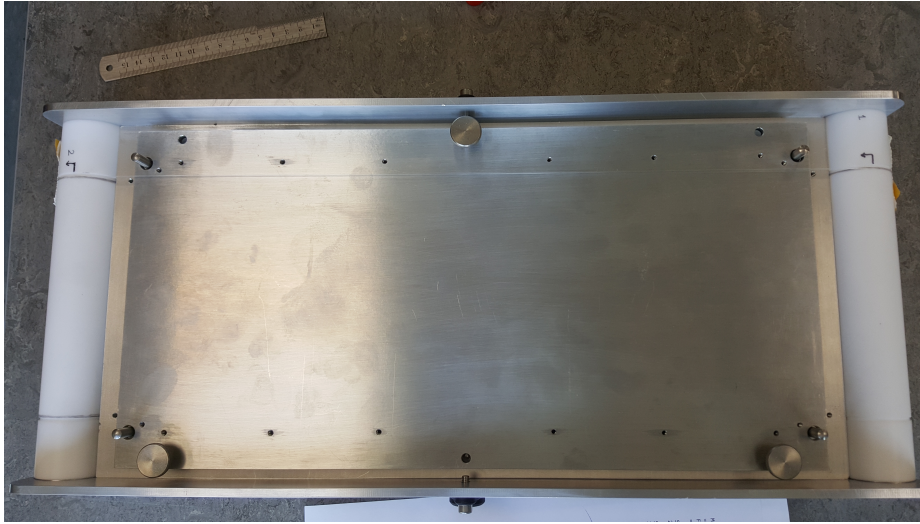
Assembled winding jig with two winds of fishing wire across the two lobes.
